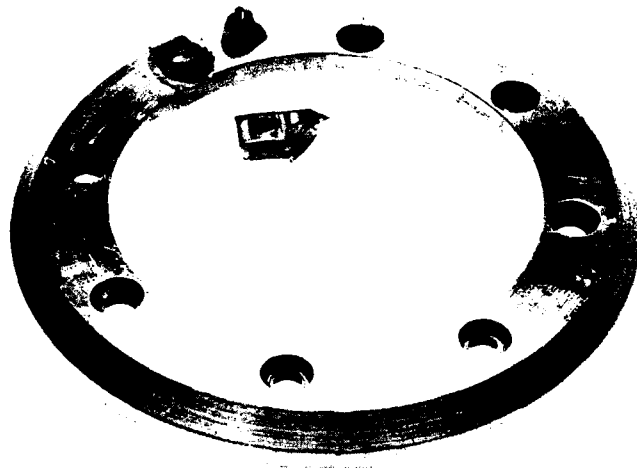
End Cap for Opposite-Drive-End Slave Bearing Found After 7.5 Hours of Test Setup No. 2; Bolt Believed to Have Broken After 3.75 Hours of Test.
